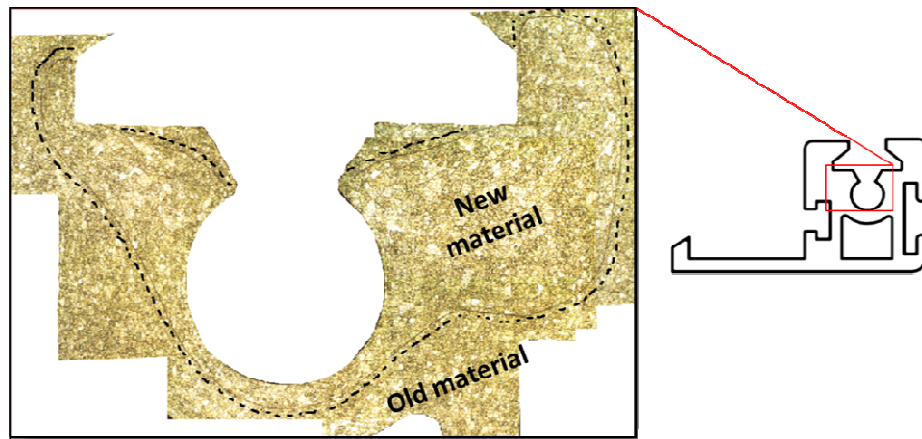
Example of charge weld appearance in a section of extruded profile.
